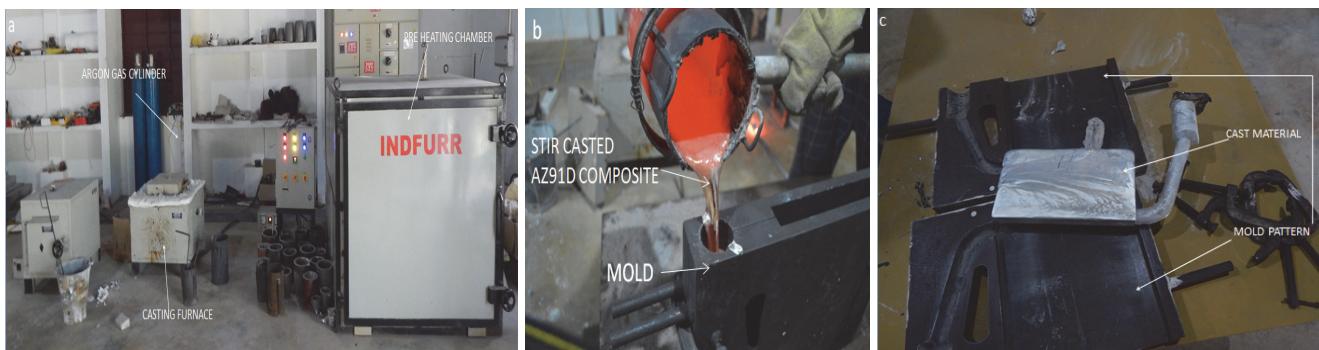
a) Stir casting setup b) Pouring into mold c) De-moulding.
